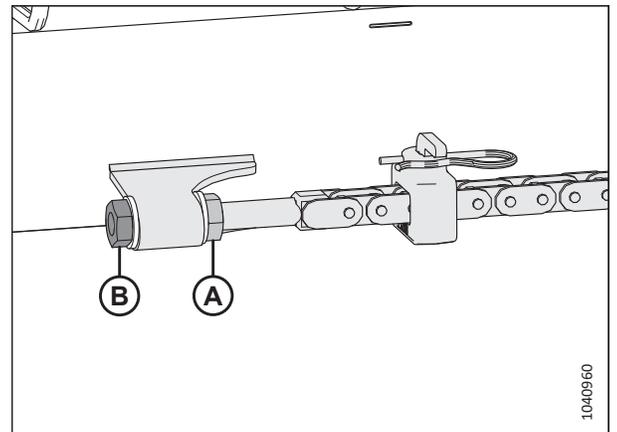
Chain Adjustment Bolt – Left Shown, Right Similar
